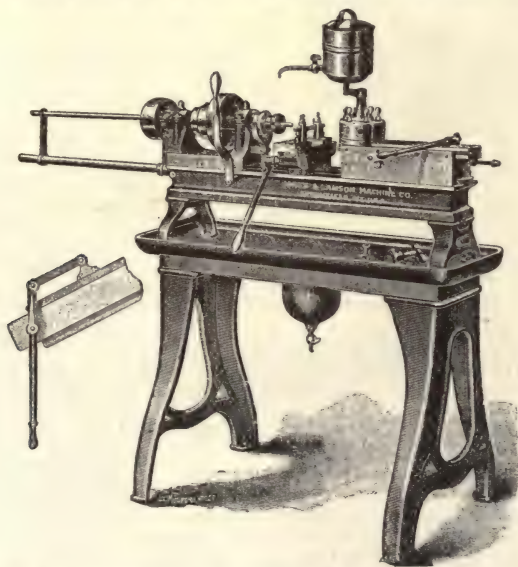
Turret-lathe with roller-feed and automatic chuck.
